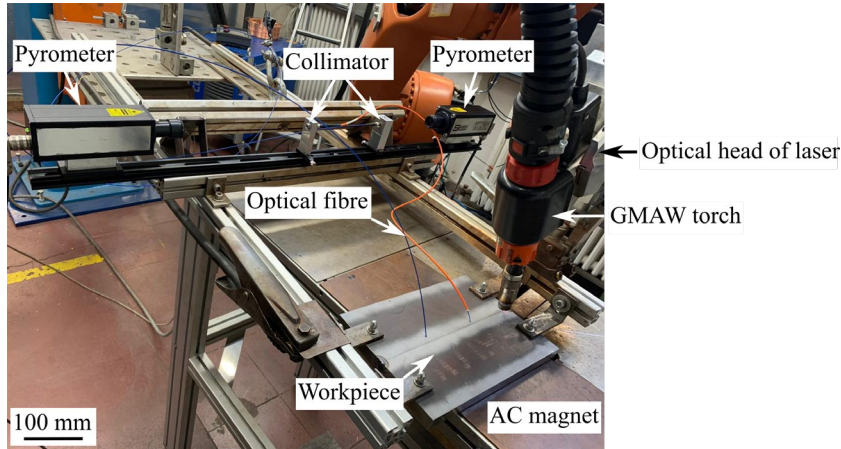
Experimental setup during HLAW of 25 mm structural steel plate with electromagnetic weld pool support and measurement of the cooling time with two-color pyrometer
